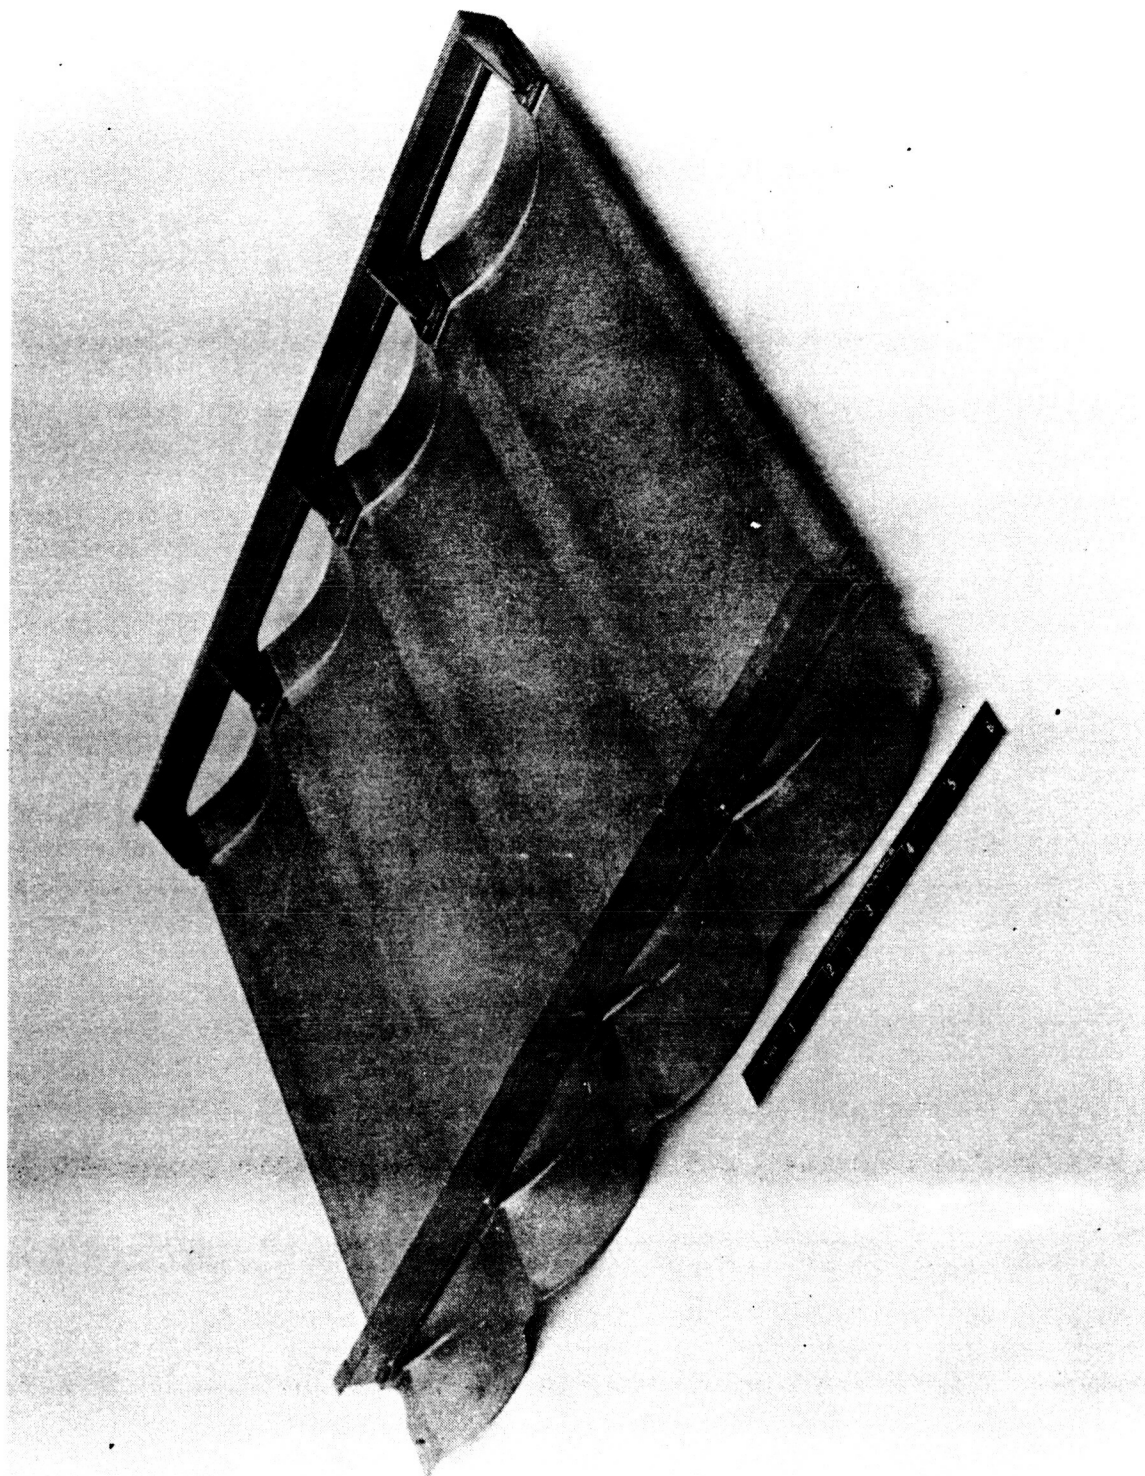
Interior View of Brazed Cb-752 Open Corrugation Heat Shield (Photo No. 126980B)
